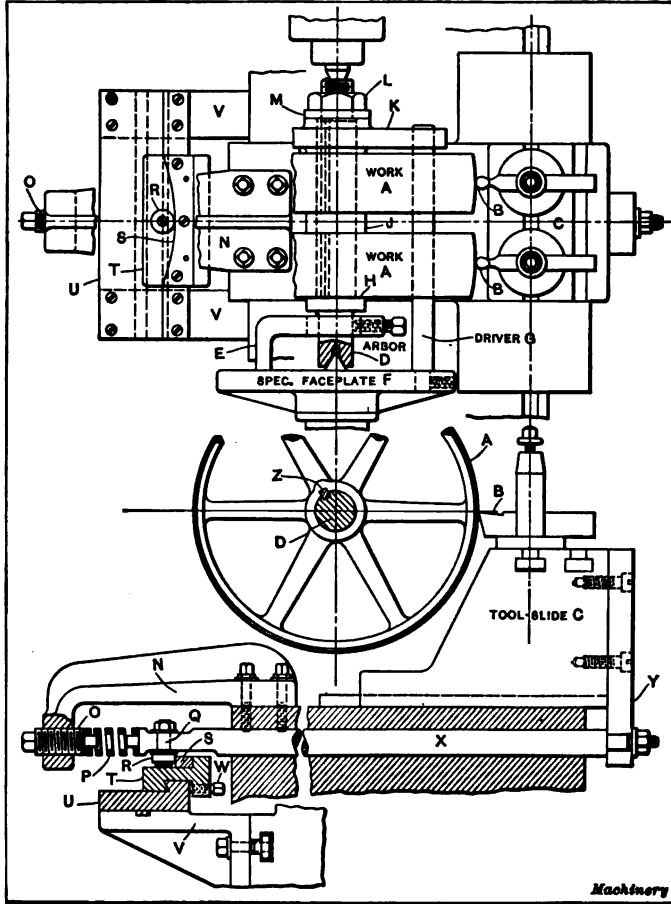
Pulley Crowning Attachment for Engine Lathe
